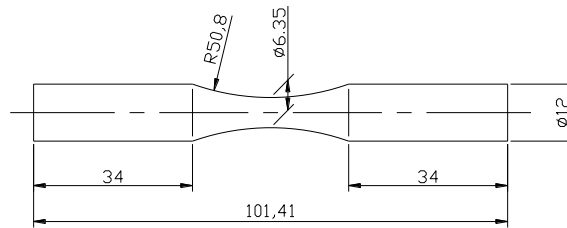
Specimen geometry used in experimental work (dimensions in mm).
